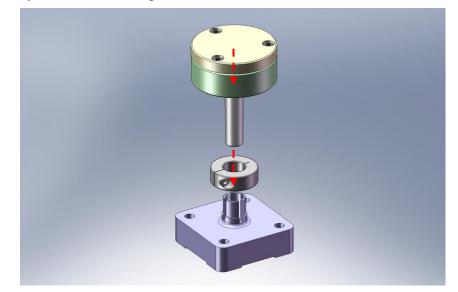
Use shaft collar to clamp Sensor Target Face Assembly to Sensor Target Mount.
